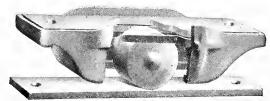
Passenger Train Car Side Bearing Showing Roller and Springs. Edwin S. Woods & Company.
